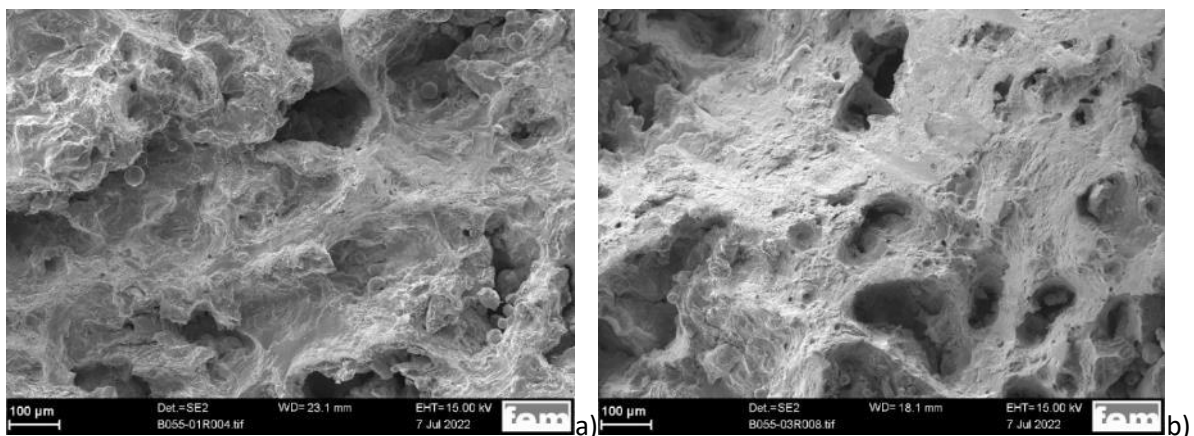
SEM investigation of the fractured surface of two CuNiSiCr + Nb samples after tensile test. a) Sample B055-1 (left position on the building plate) b) Sample B055-3 (right position on the building plate)
